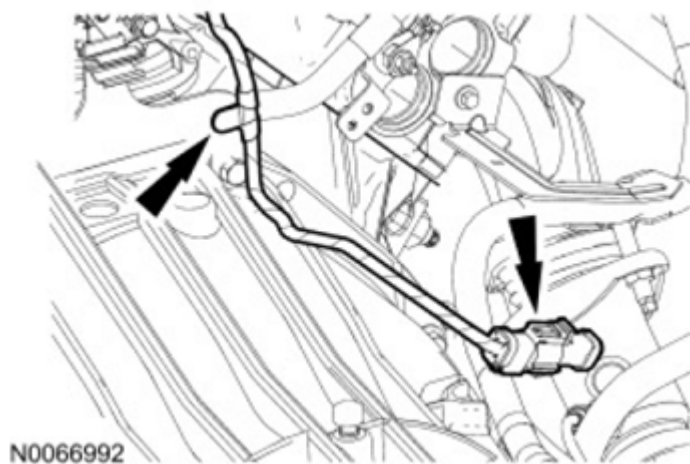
Locating RH Heated Oxygen Sensor Wiring Harness Retainers
